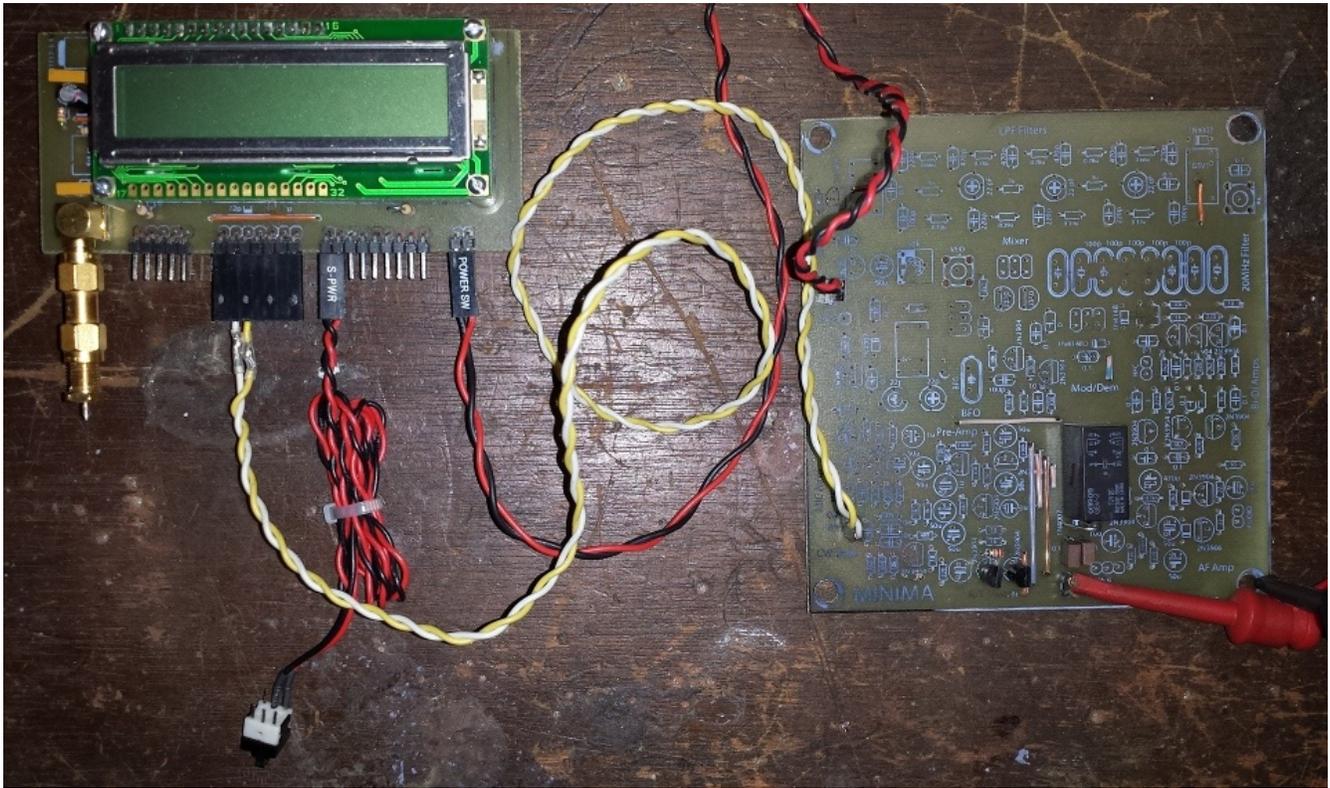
Test setup for the Main Board R/T Switch assembly.
